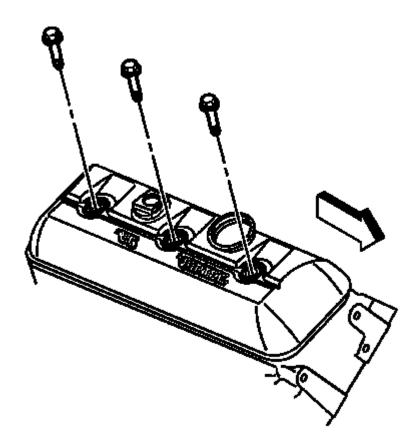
View Of Valve Rocker Arm Cover Bolts (Right) Courtesy of GENERAL MOTORS CORP.
